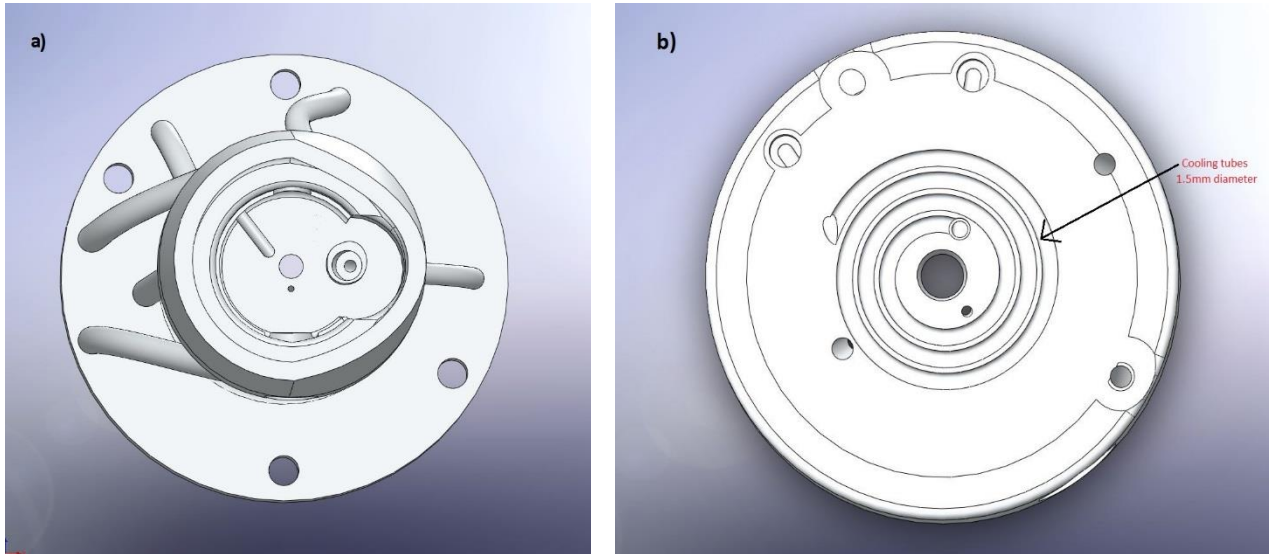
(a) Bottom view of nozzle (left) and (b) cross section view of cooling chamber (right).
